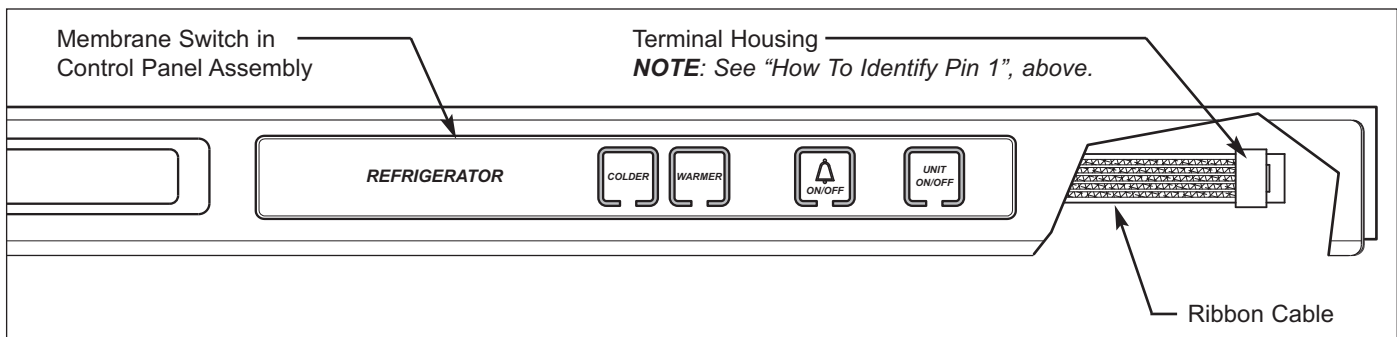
Refrigerator Control Panel Assembly with Cut-Away View to Show Ribbon Cable
